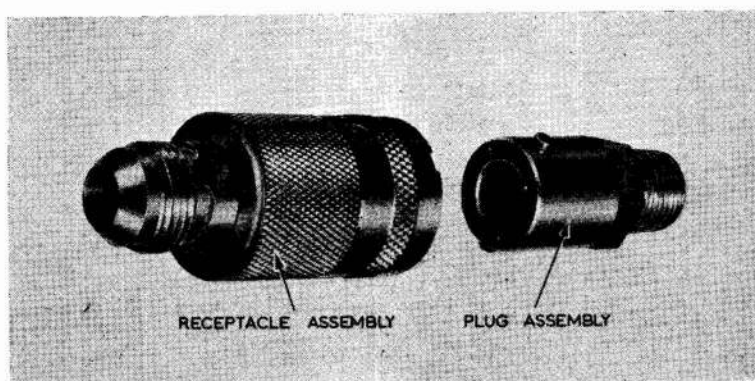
Quick-disconnect coupling (Part No. 256000)
